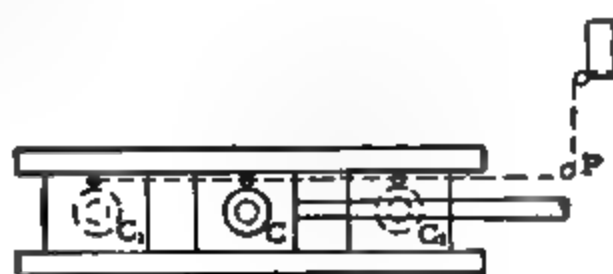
Correct Method of Connecting Indicator to Cross-head.
